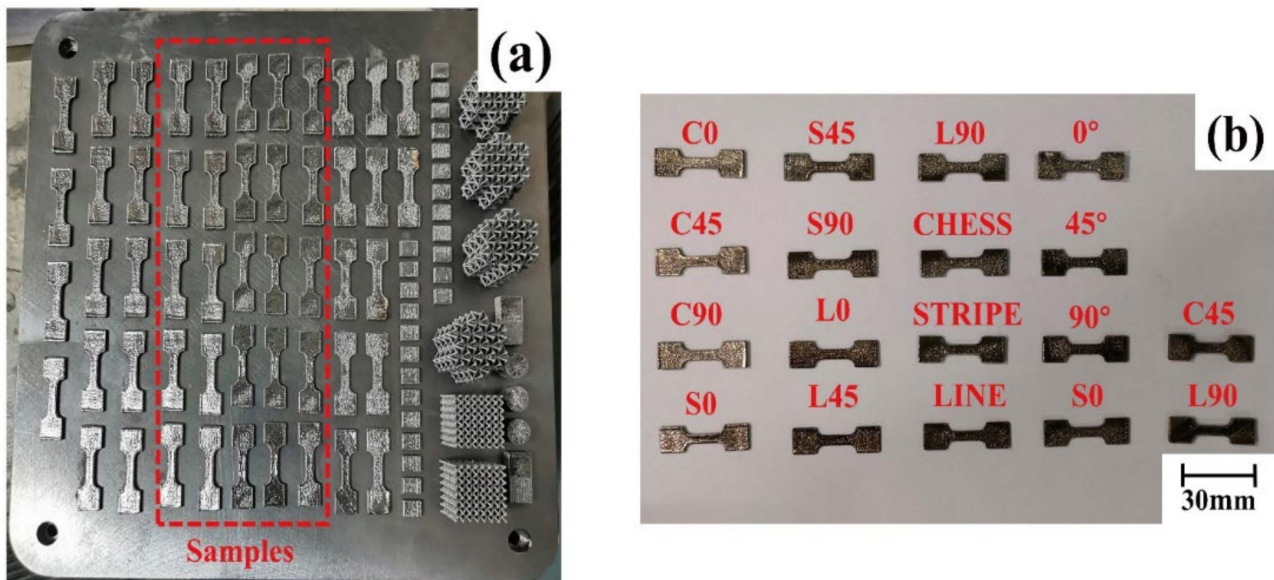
L-PBF forming tensile specimen. (a) L-PBF forming sample; (b) the actual L-PBF tensile specimen after high-speed wire cutting.
